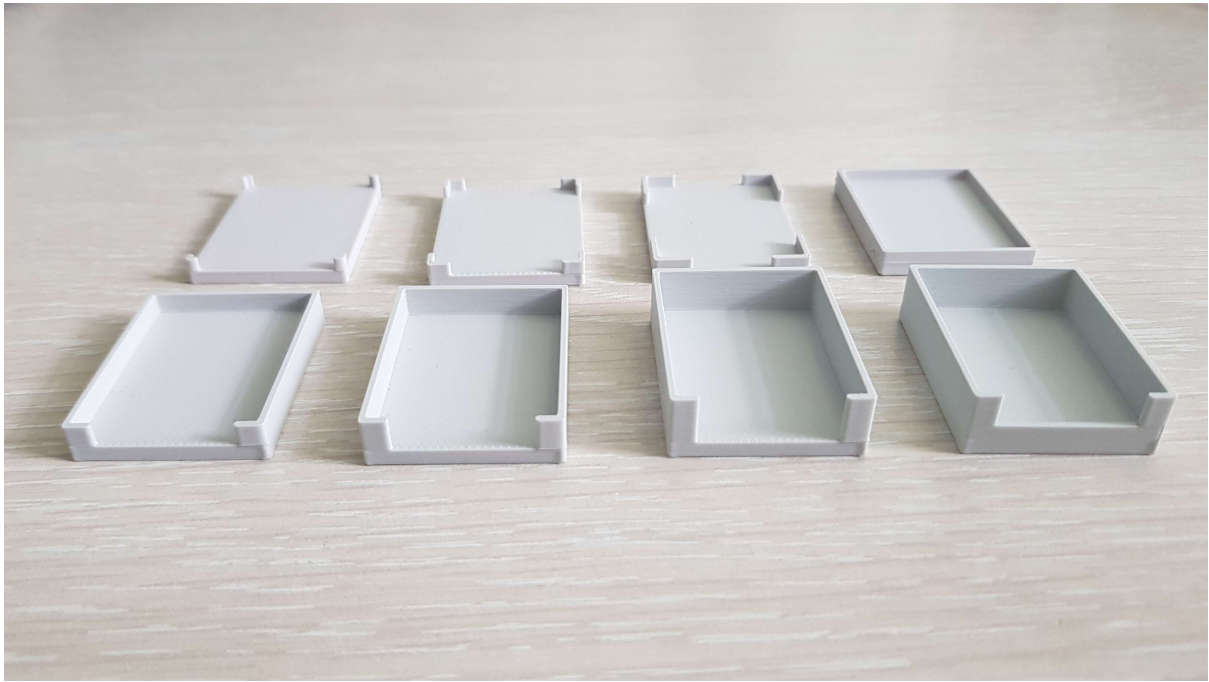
Prototypes of magnetometer holder connections to the magnetometer
